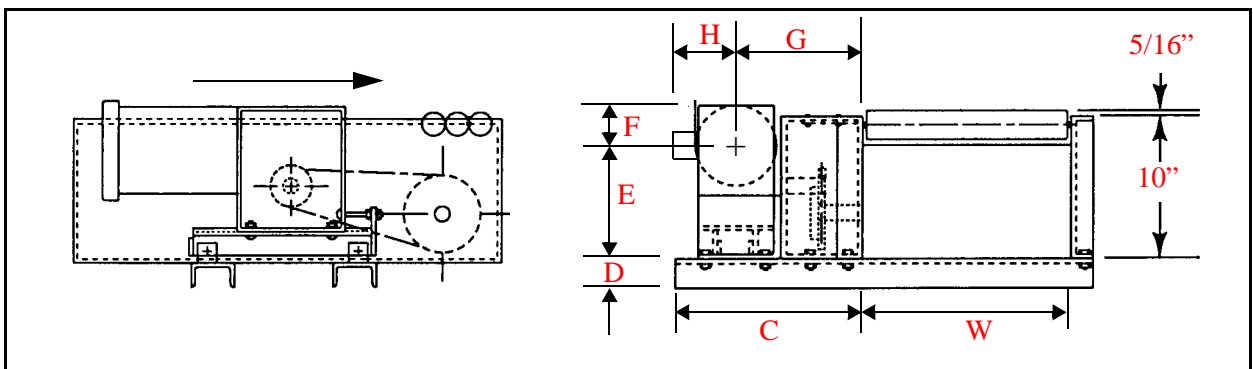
Power Unit - Side Mounted (SM) RH Assembly Shown
